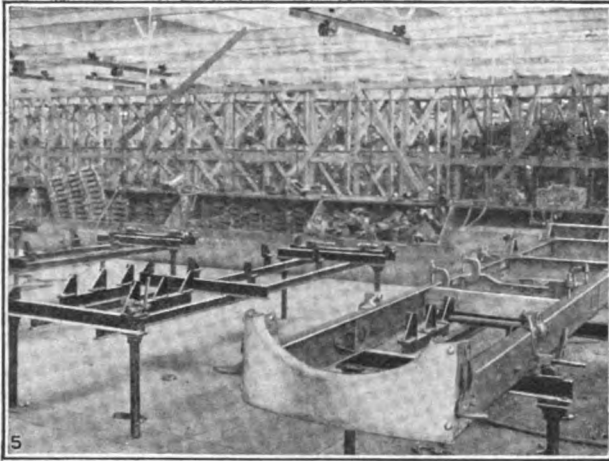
THE ASSEMBLY STAND. FIG. 7. PARTS READY FOR ASSEMBLY
